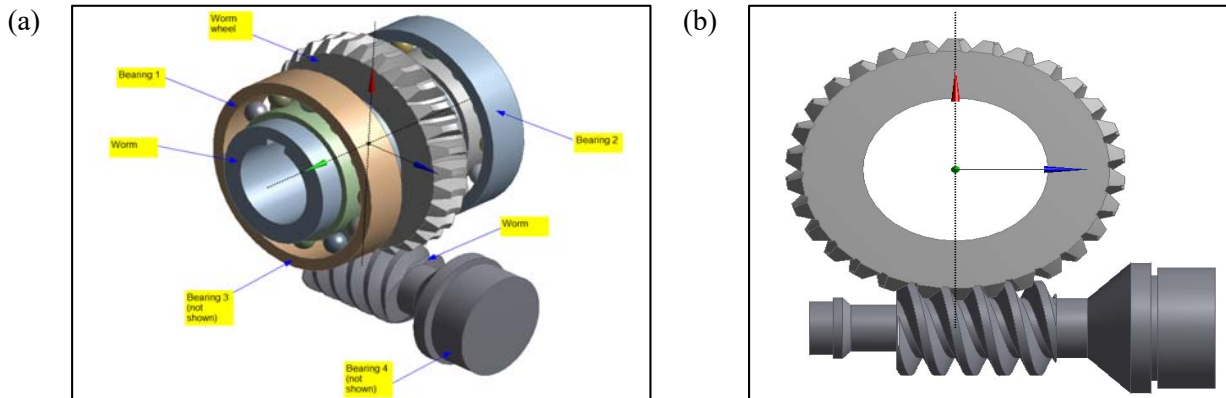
3-D geometry of worm gear pair: (a) isometric view, (b) side view.
